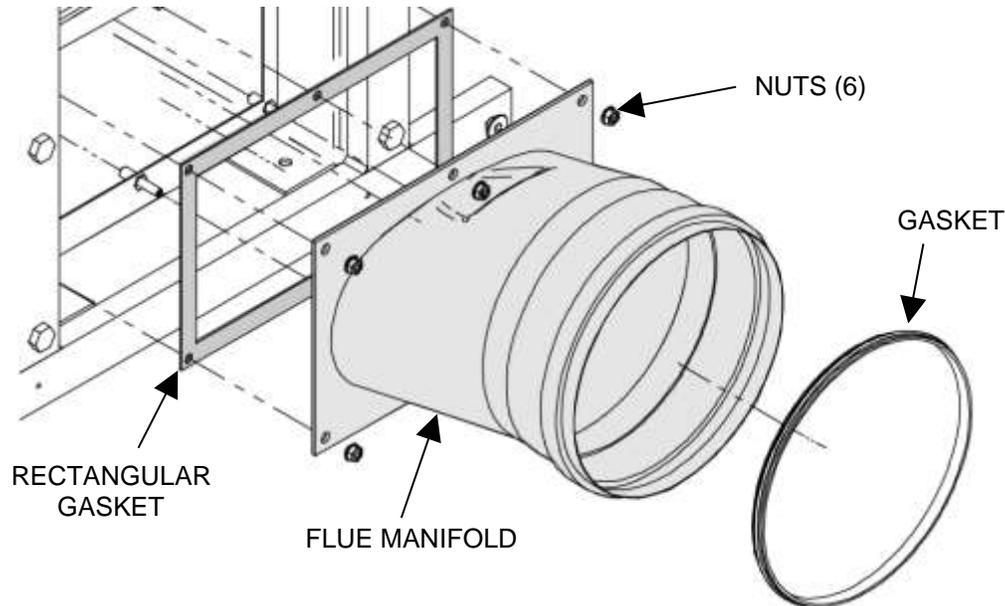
Connection of Flue Manifold to Boiler Exhaust Opening
